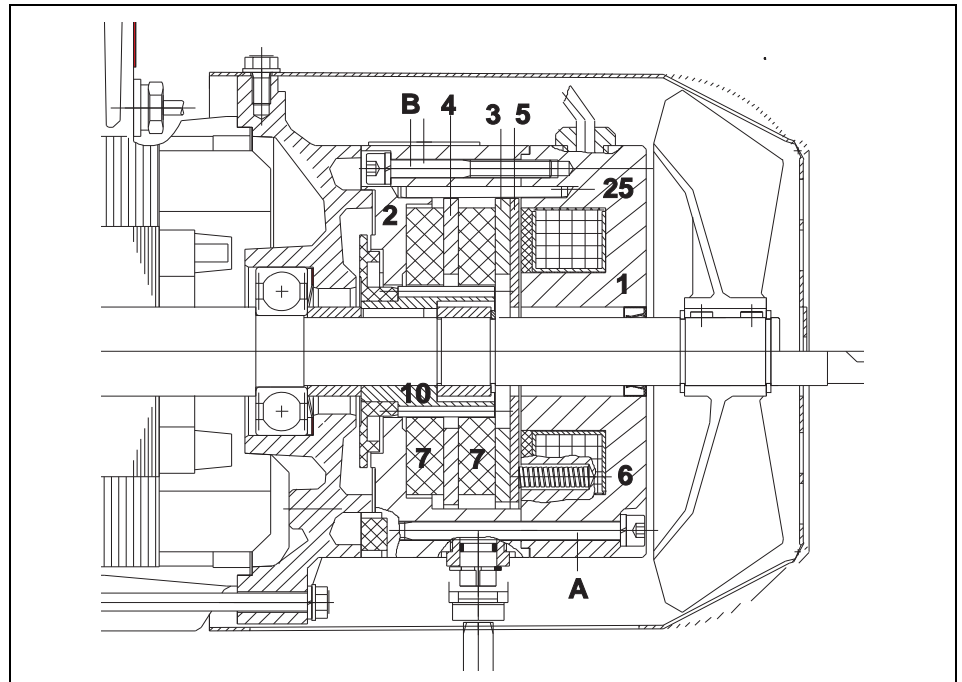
Double-disc spring-loaded brake with D.C. solenoid release
